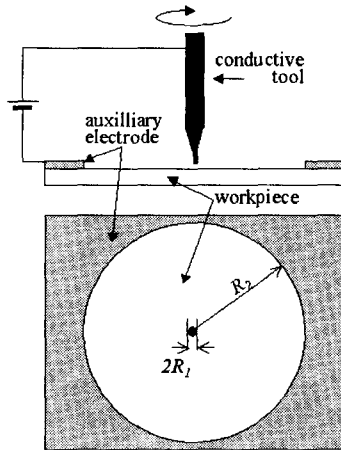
Geometry of tool and auxiliary electrode to be identical to the flow close side of the tool
